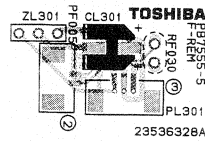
U0015 F-REM PC Board (Top Side)
